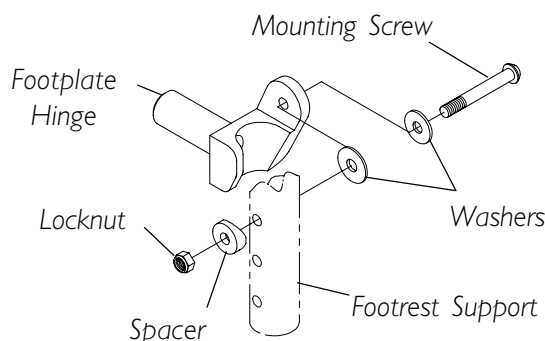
INSTALLING ADJUSTABLE ANGLE FLIP-UP FOOTPLATE HINGE
